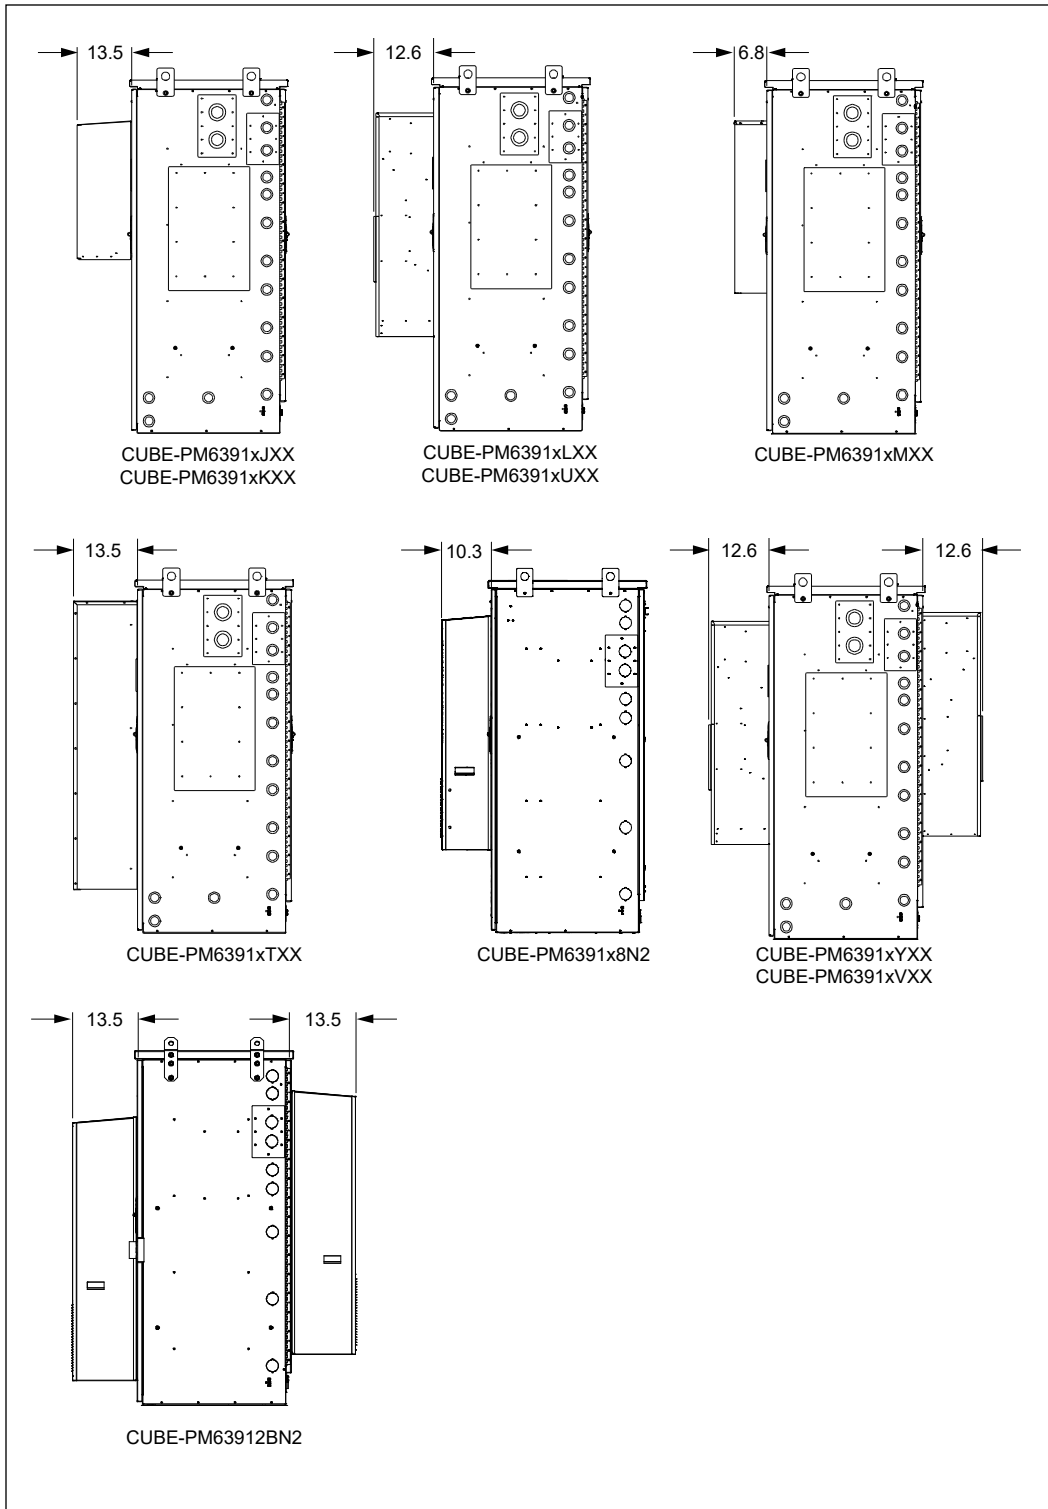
CUBE Thermal Equipment Dimensions (in inches)
